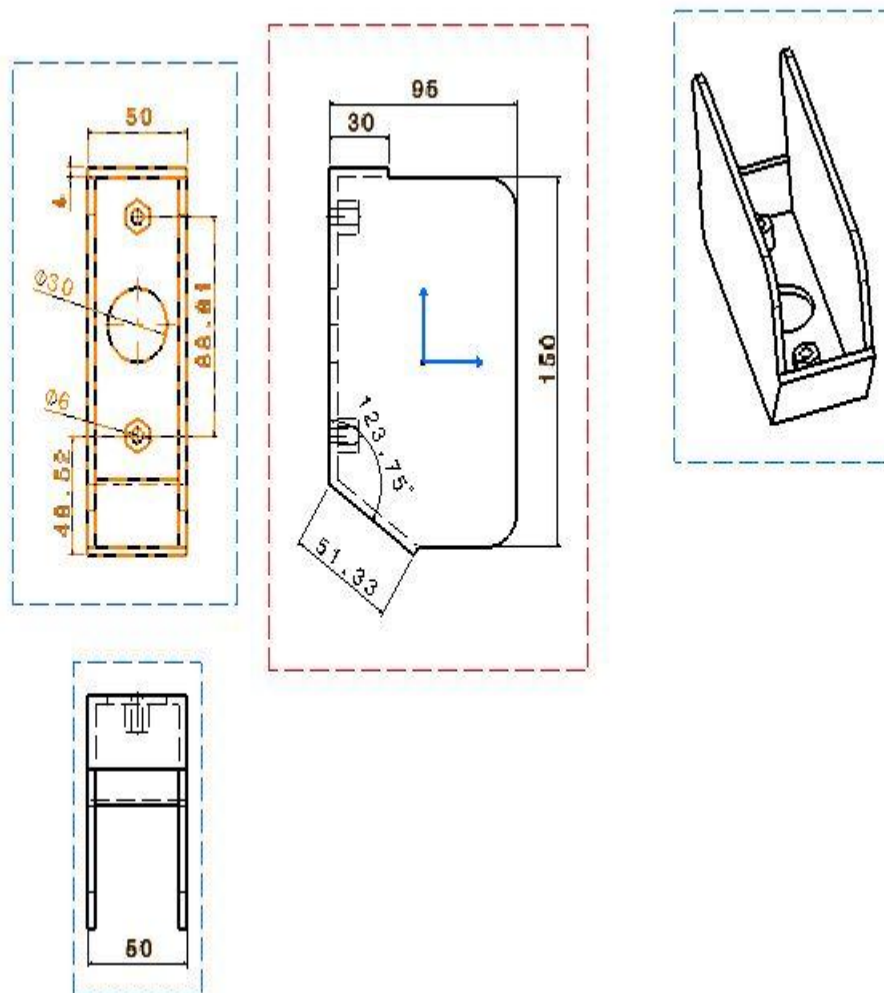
New designs (2) of the mounting bracket (All Dimensions are in mm)
